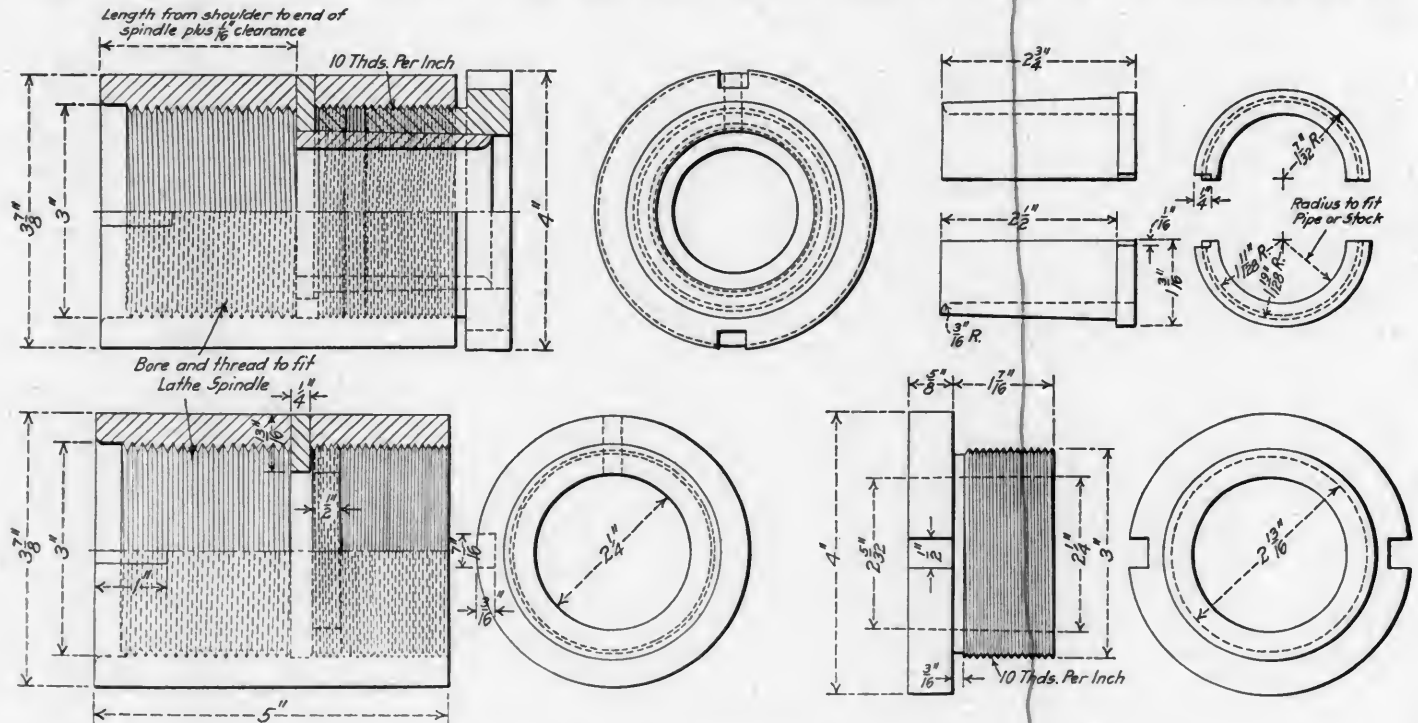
Lathe Chuck for Holding Pipe or Round Iron
